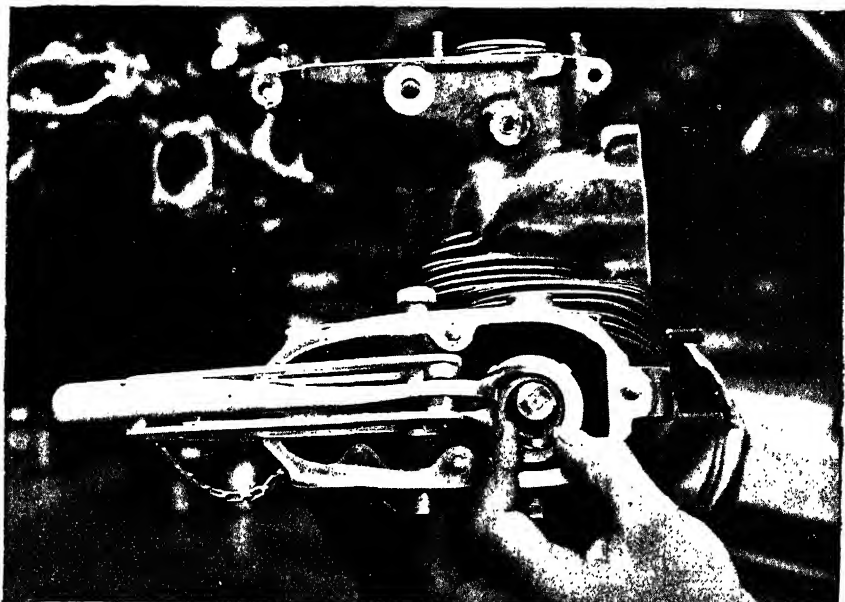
ASSEMBLY OF VALVE COLLETS
